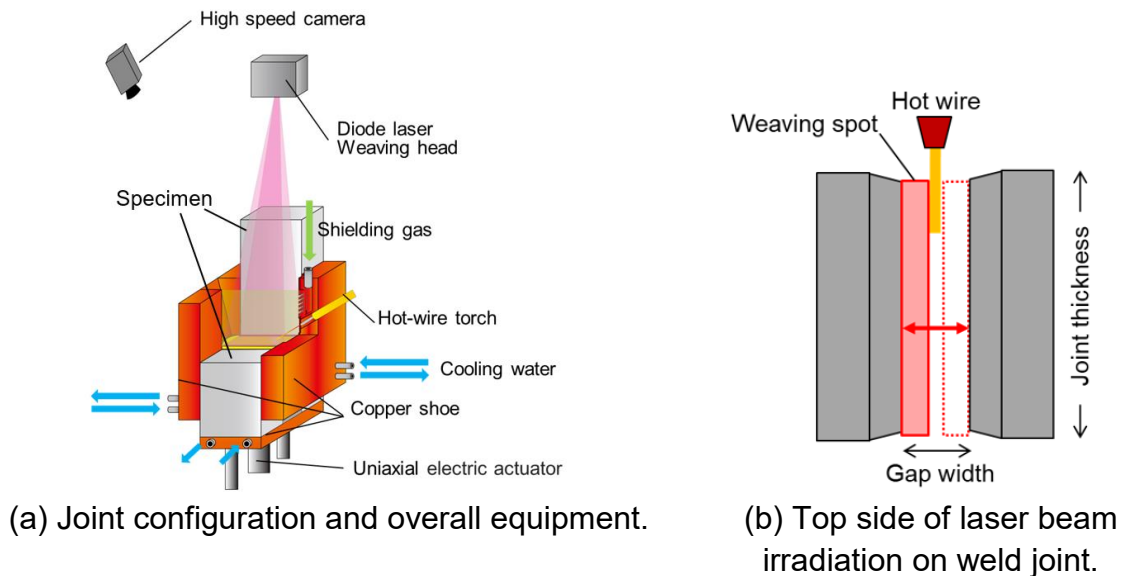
Apparatuses of hot-wire laser single-pass vertical welding using the weaving system through on weld groove [79].
